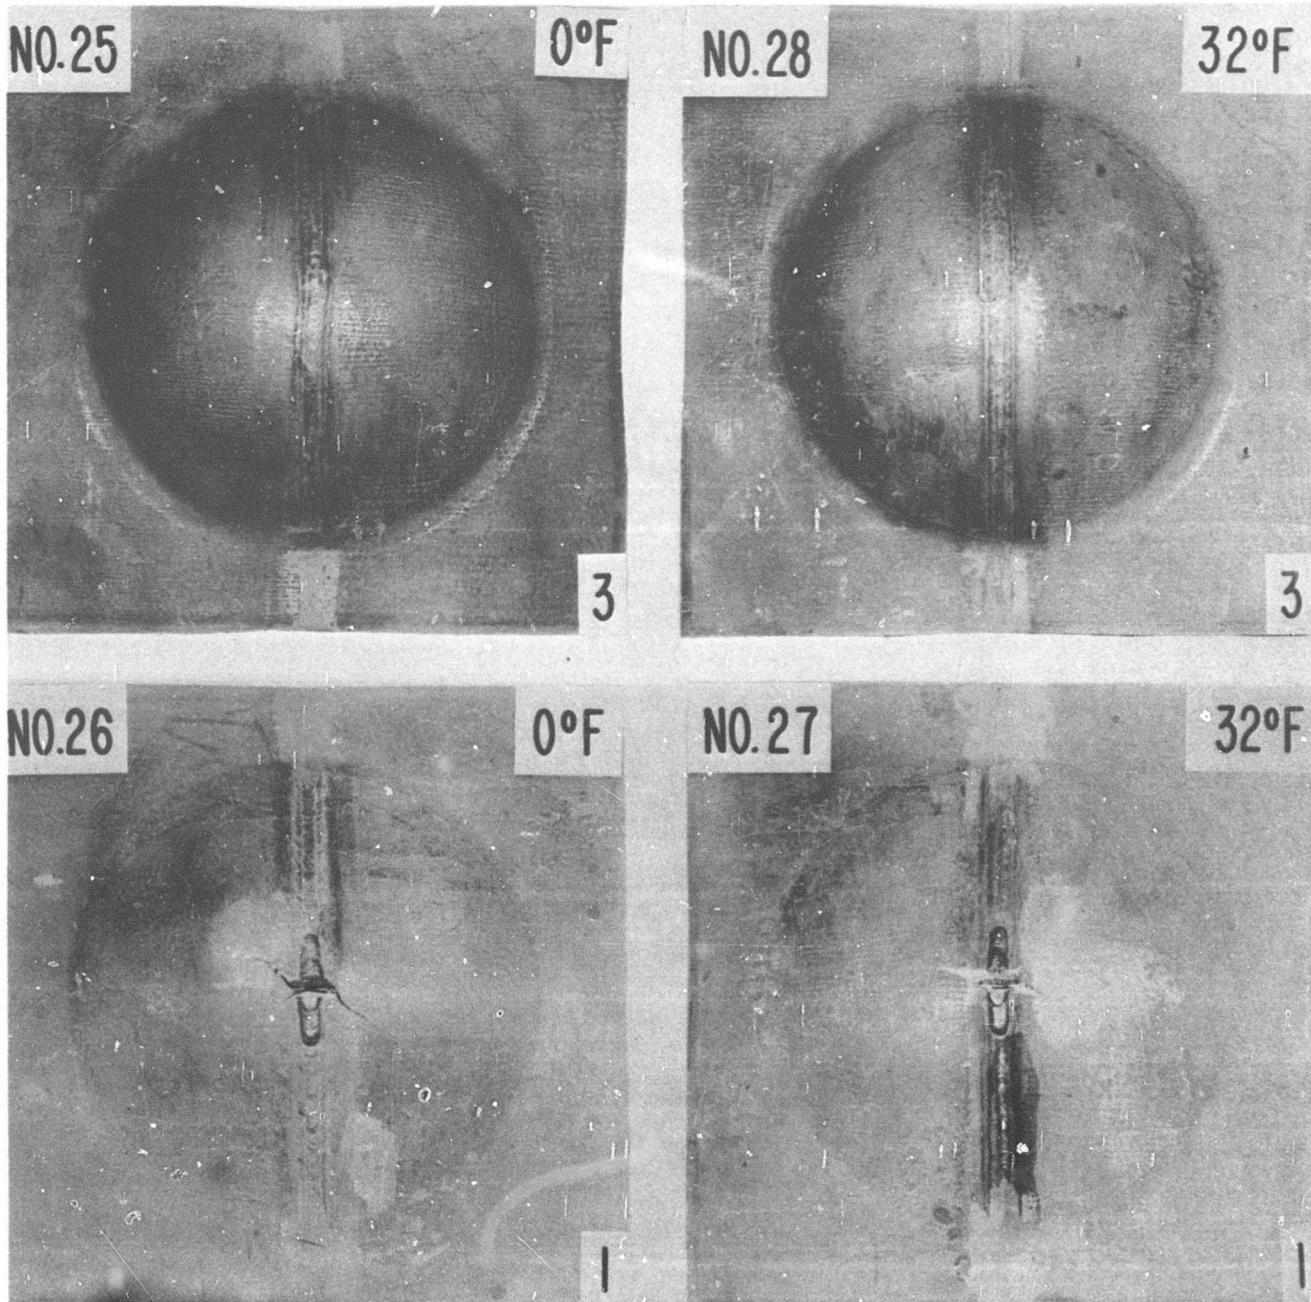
Explosion-bulge test fracture characteristics of manual Mil 26015 weldments. Bottom samples modified with crack-starter weld.
